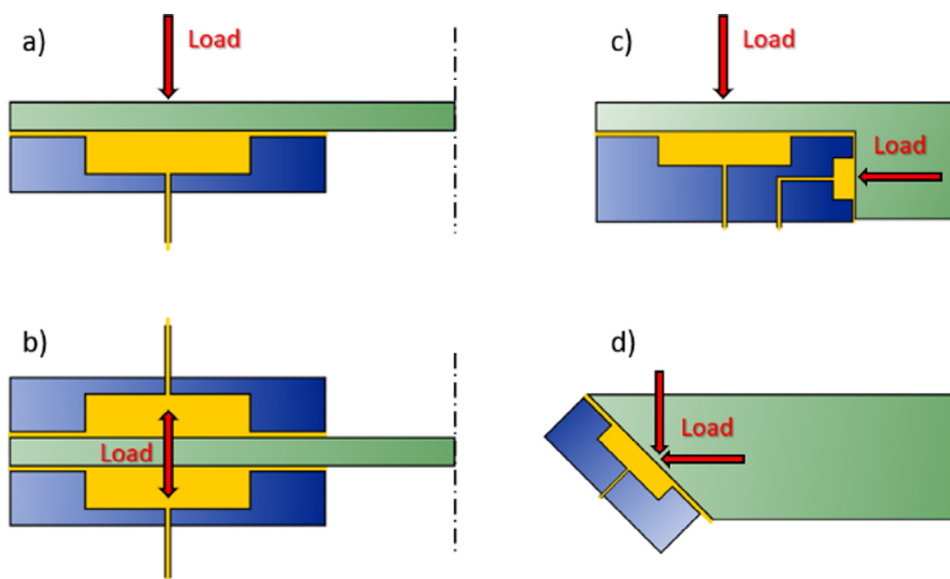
Types of hydrostatic bearing according to loading direction: a) thrust open type, b) thrust closed type, c) open type combined and d) conical.
